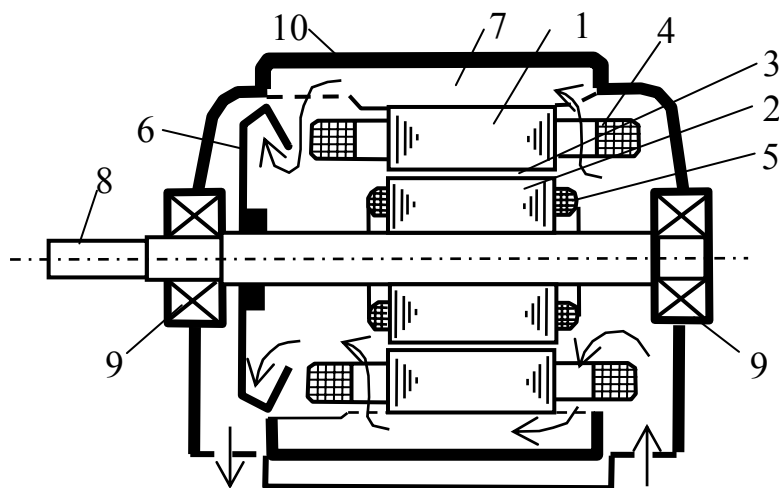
The device of asynchronous motor: 1 – stator core; 2 – core of the rotor; 3 – air gap; 4 – winding of stator; 5 – rotor winding; 6 – blast; 7 – ventilation canals (arrows show the direction of movement of the cooling air on channels); 8 – shaft; 9 – bearings; 10 – base
